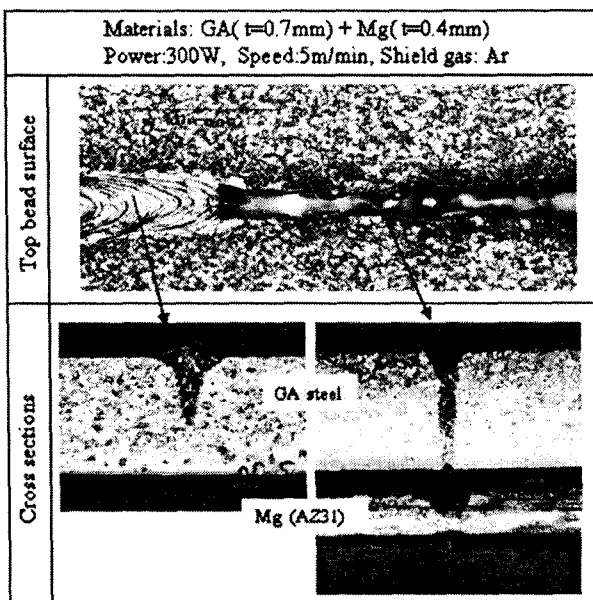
Top surface & Cross sections of bead in lap welding (GA steel - Mg alloy)
